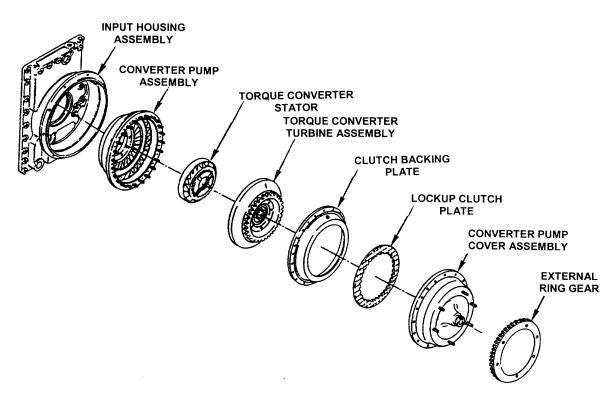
Input Housing and Exploded View of Major Components of the Torque Converter.
